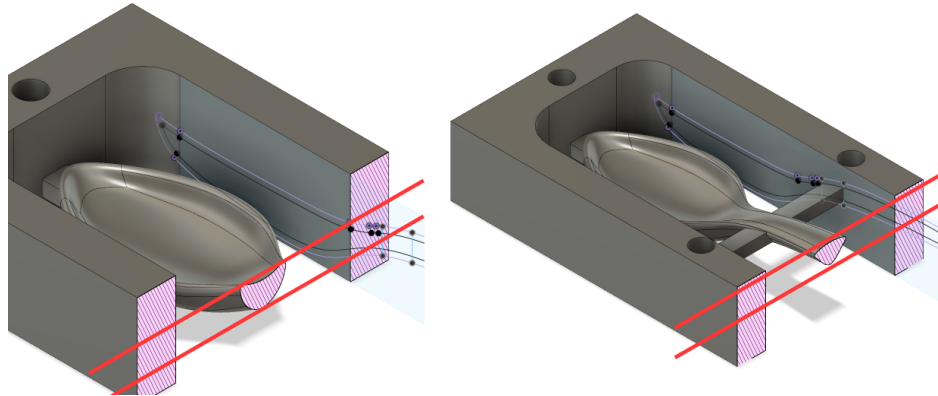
Minimum Thickness Assertion. From the notebook, an effect function enables Fusion 360 CAM’s section analysis tool and prompts the fabricator to inspect the minimum thicknesses of the XZ cut planes. After inspecting this, the fabricator checks a checkbox in the notebook, which returns true, fulfilling the assertion.
